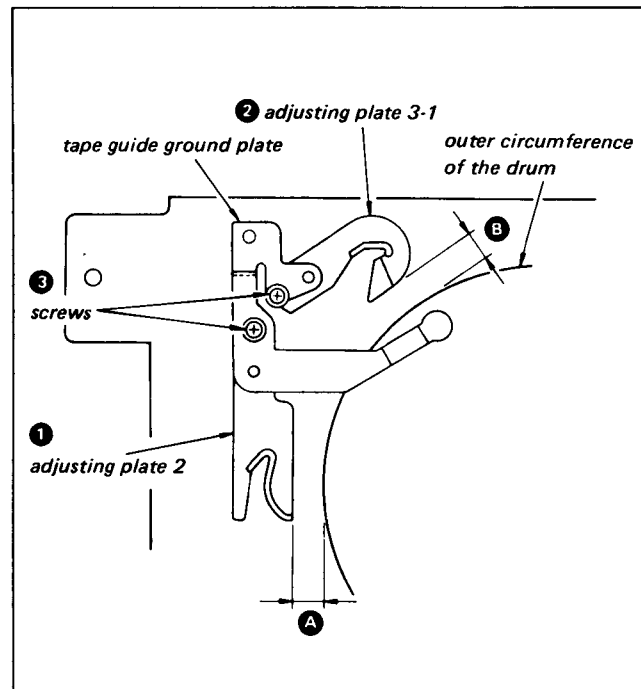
Measurement of the position of adjusting plates 2 and 3-1
